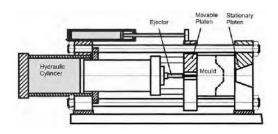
Clamping unit of injection moulding machine (Funda, 2014)
